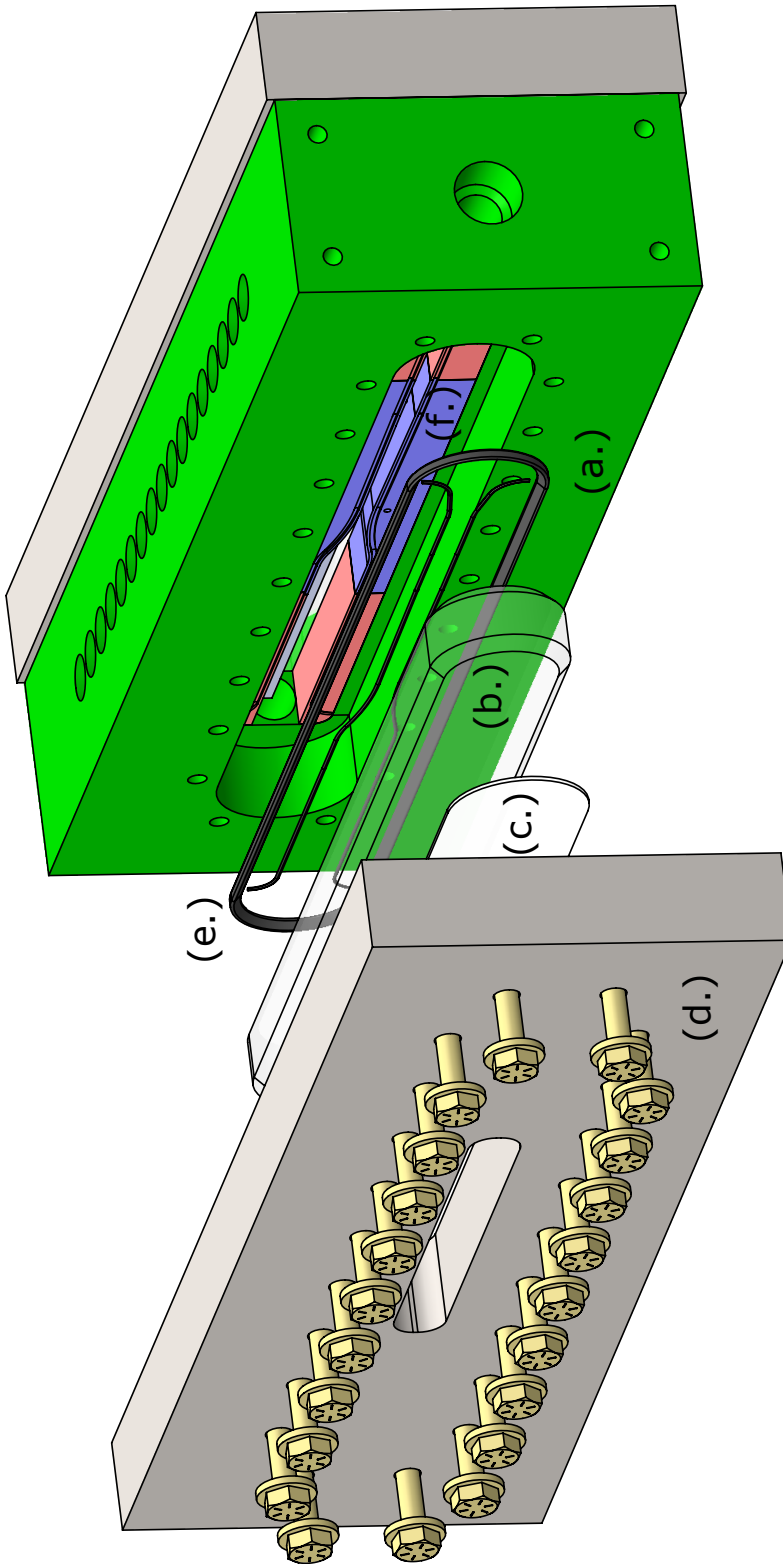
Exploded view of the test section showing (a.) main body, (b.) high pressure window, (c.) window spacer/cushion, (d.) retaining flange, (e.) main o-ring seal, (f.) nozzle inserts.
